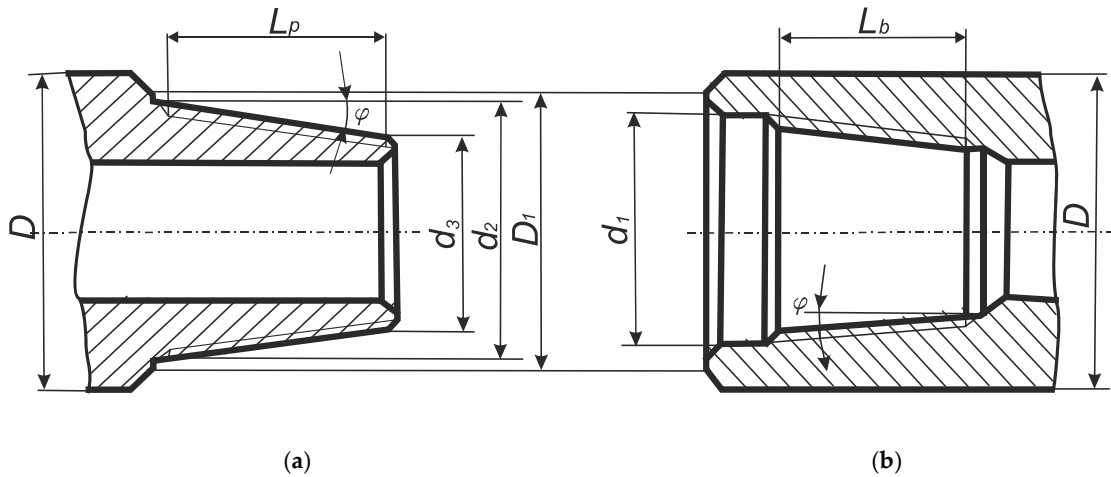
Drawing of the drill-string tool-joint parts of the pin (a) and the box (b): φ is the taper angle, D is the outer diameter of the tool-joint tapered thread, D_1 is the diameter of the tool-joint tapered thread on the end section, d_1 is the diameter of the cylindrical twist, d_2 is the diameter of the larger base of the cone, d_3 is the diameter of the smaller base of the cone, L_p is the length of the threaded part of the pin, L_b is the length of the threaded parts of the box.
